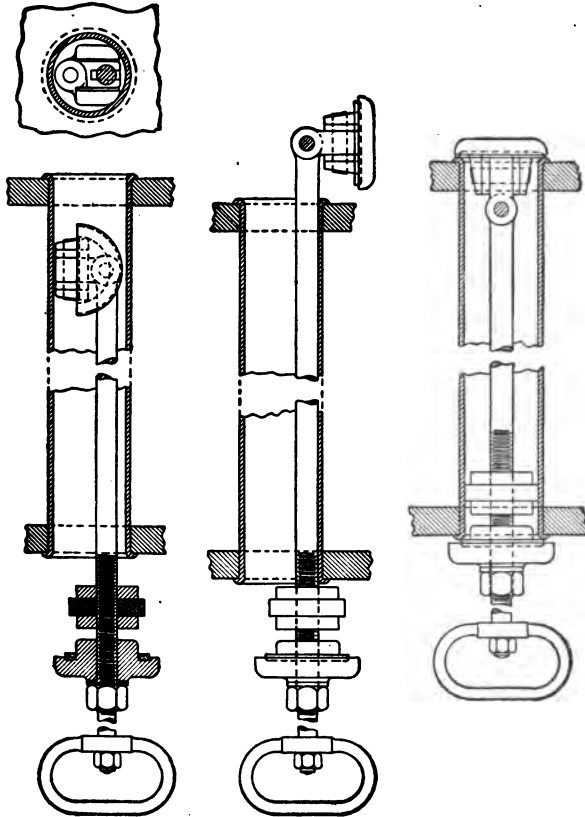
Tube-Stopper Designed for Insertion without Drawing Fire.
